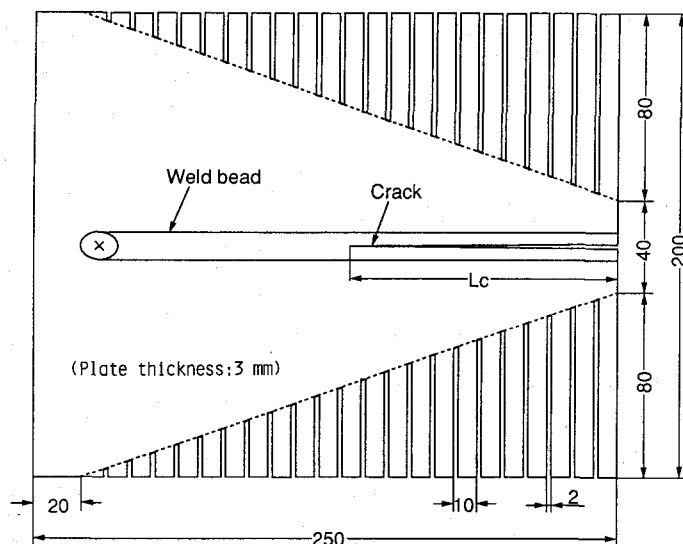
Shape and dimension of GMAW crater cracking test specimen.
